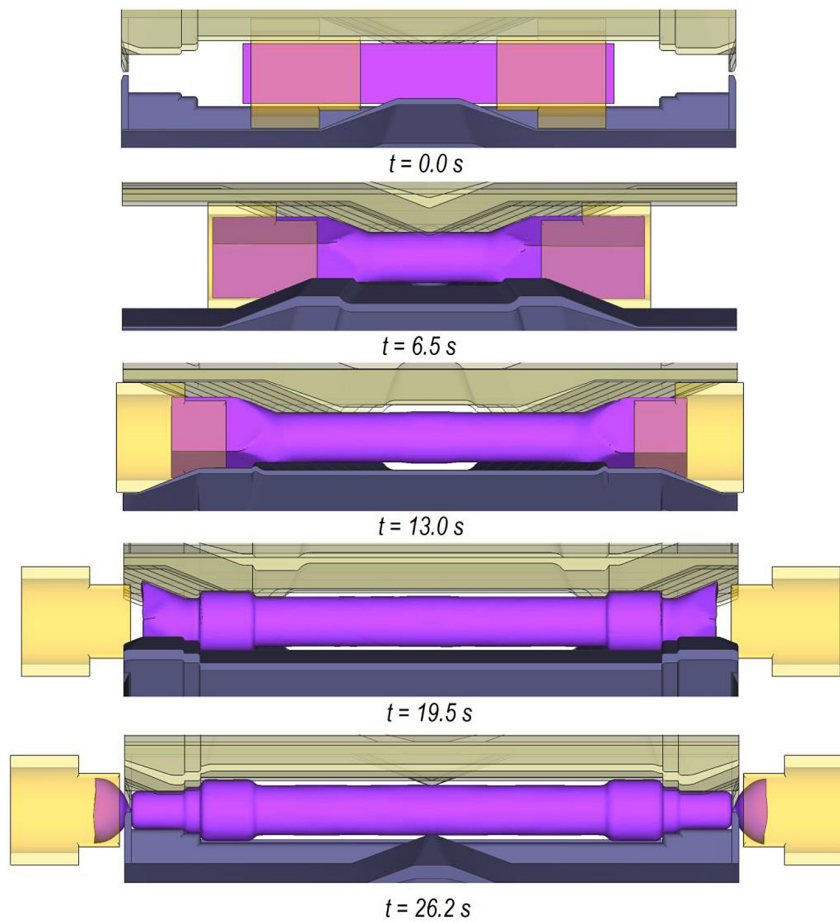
Changes in the shape of a workpiece in a CWR process where a railcar axle is formed from a rectangular billet
